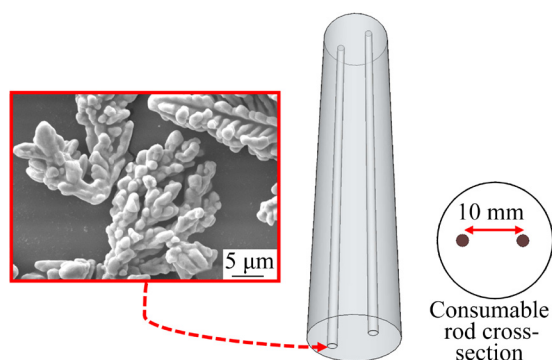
Schematic view of holes drilled in consumable rod cross section
